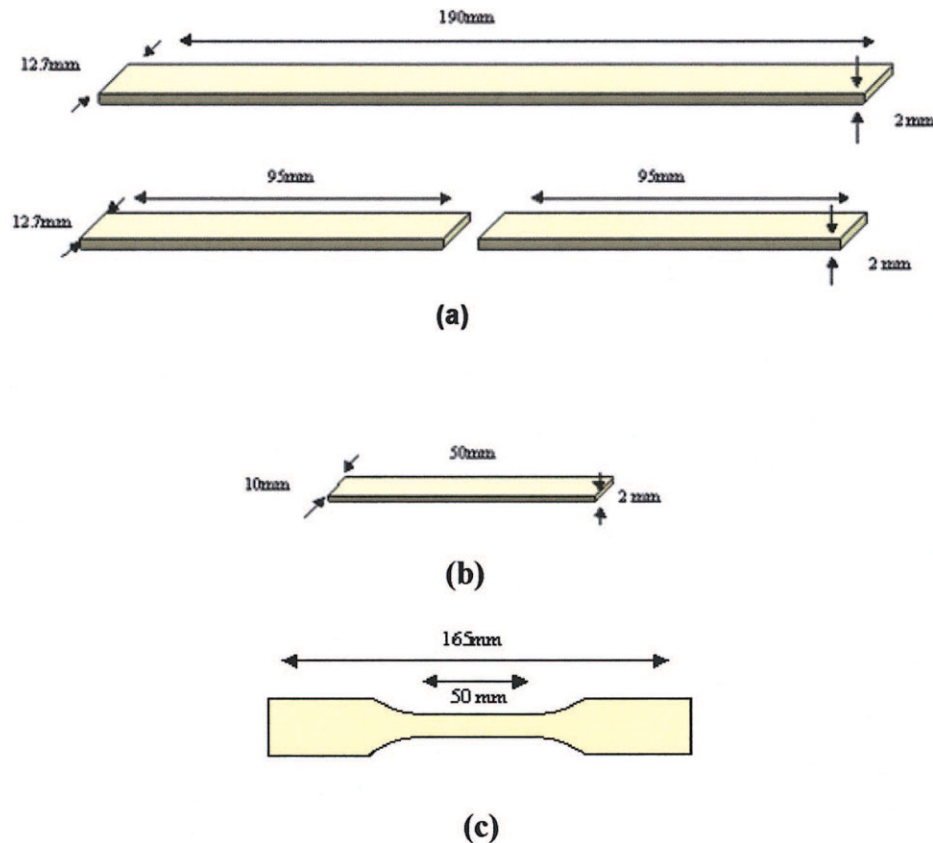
Specimens geometry for (A) three-point bending, (B) DMA, and (C) tensile tests.
